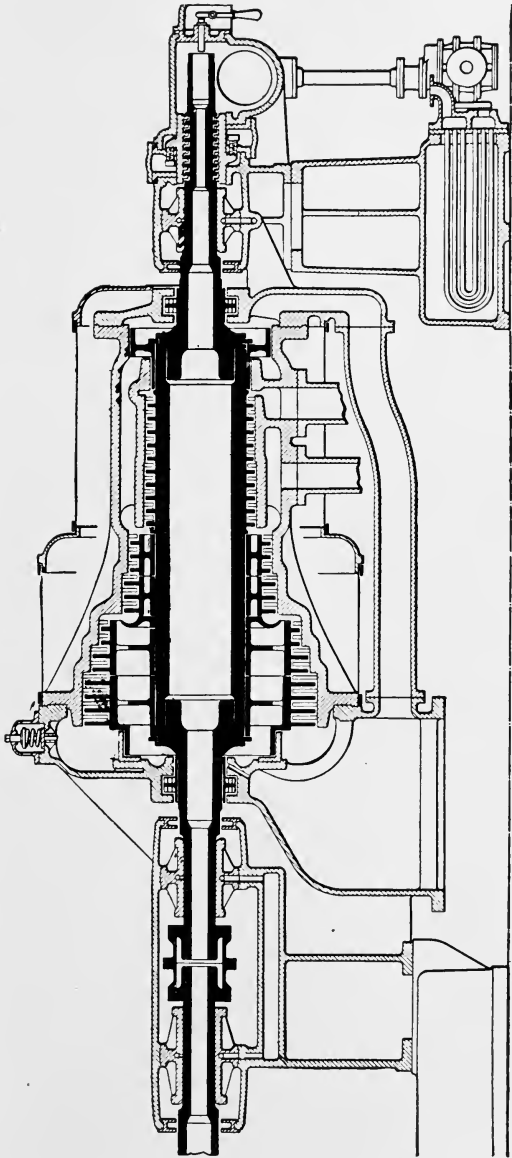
Section through Allis-Chalmers Steam Turbine.
